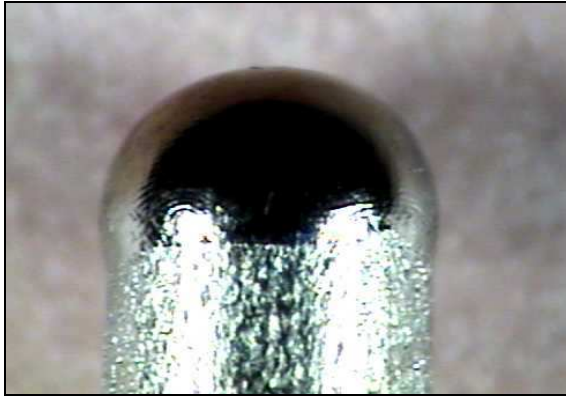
Titanium tube sealing with adjusted welding parameters (first end).
